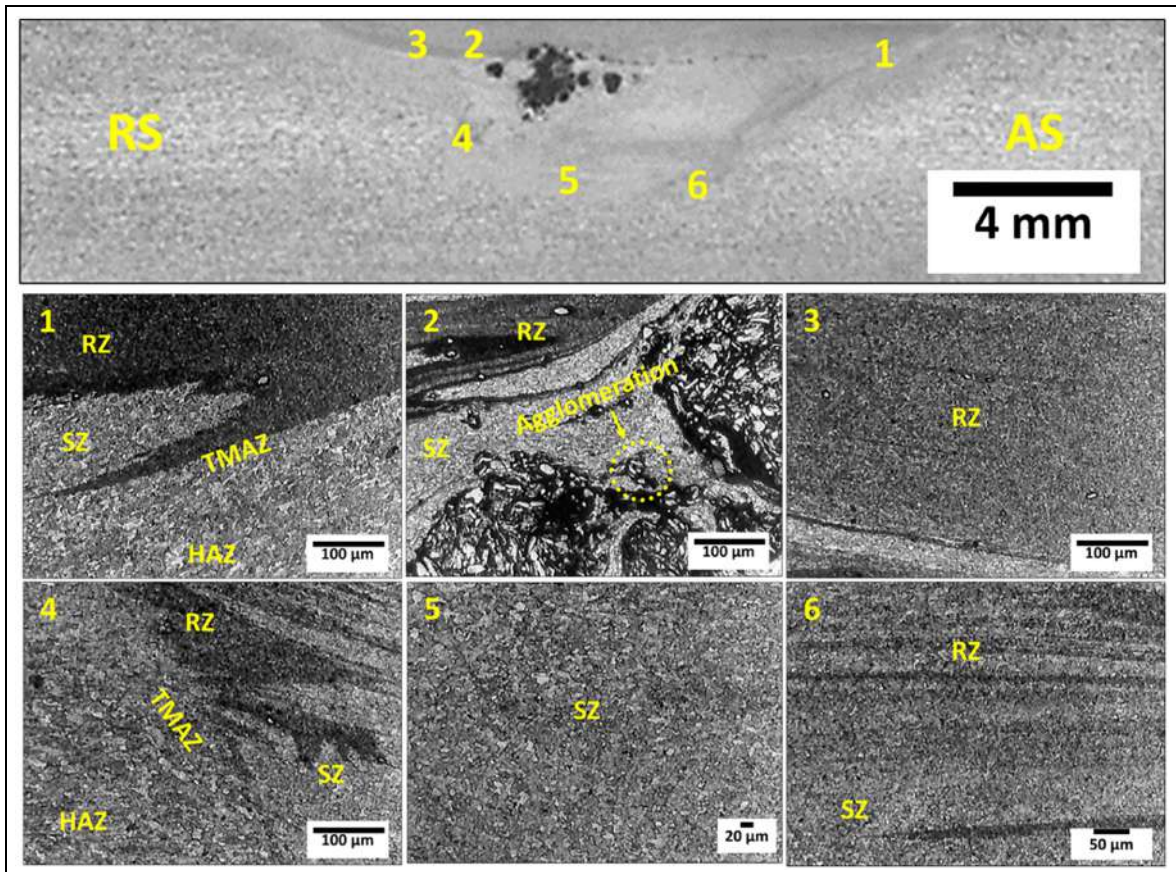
Macroscopic image of sample DP3 and several locations of the welding zone.
